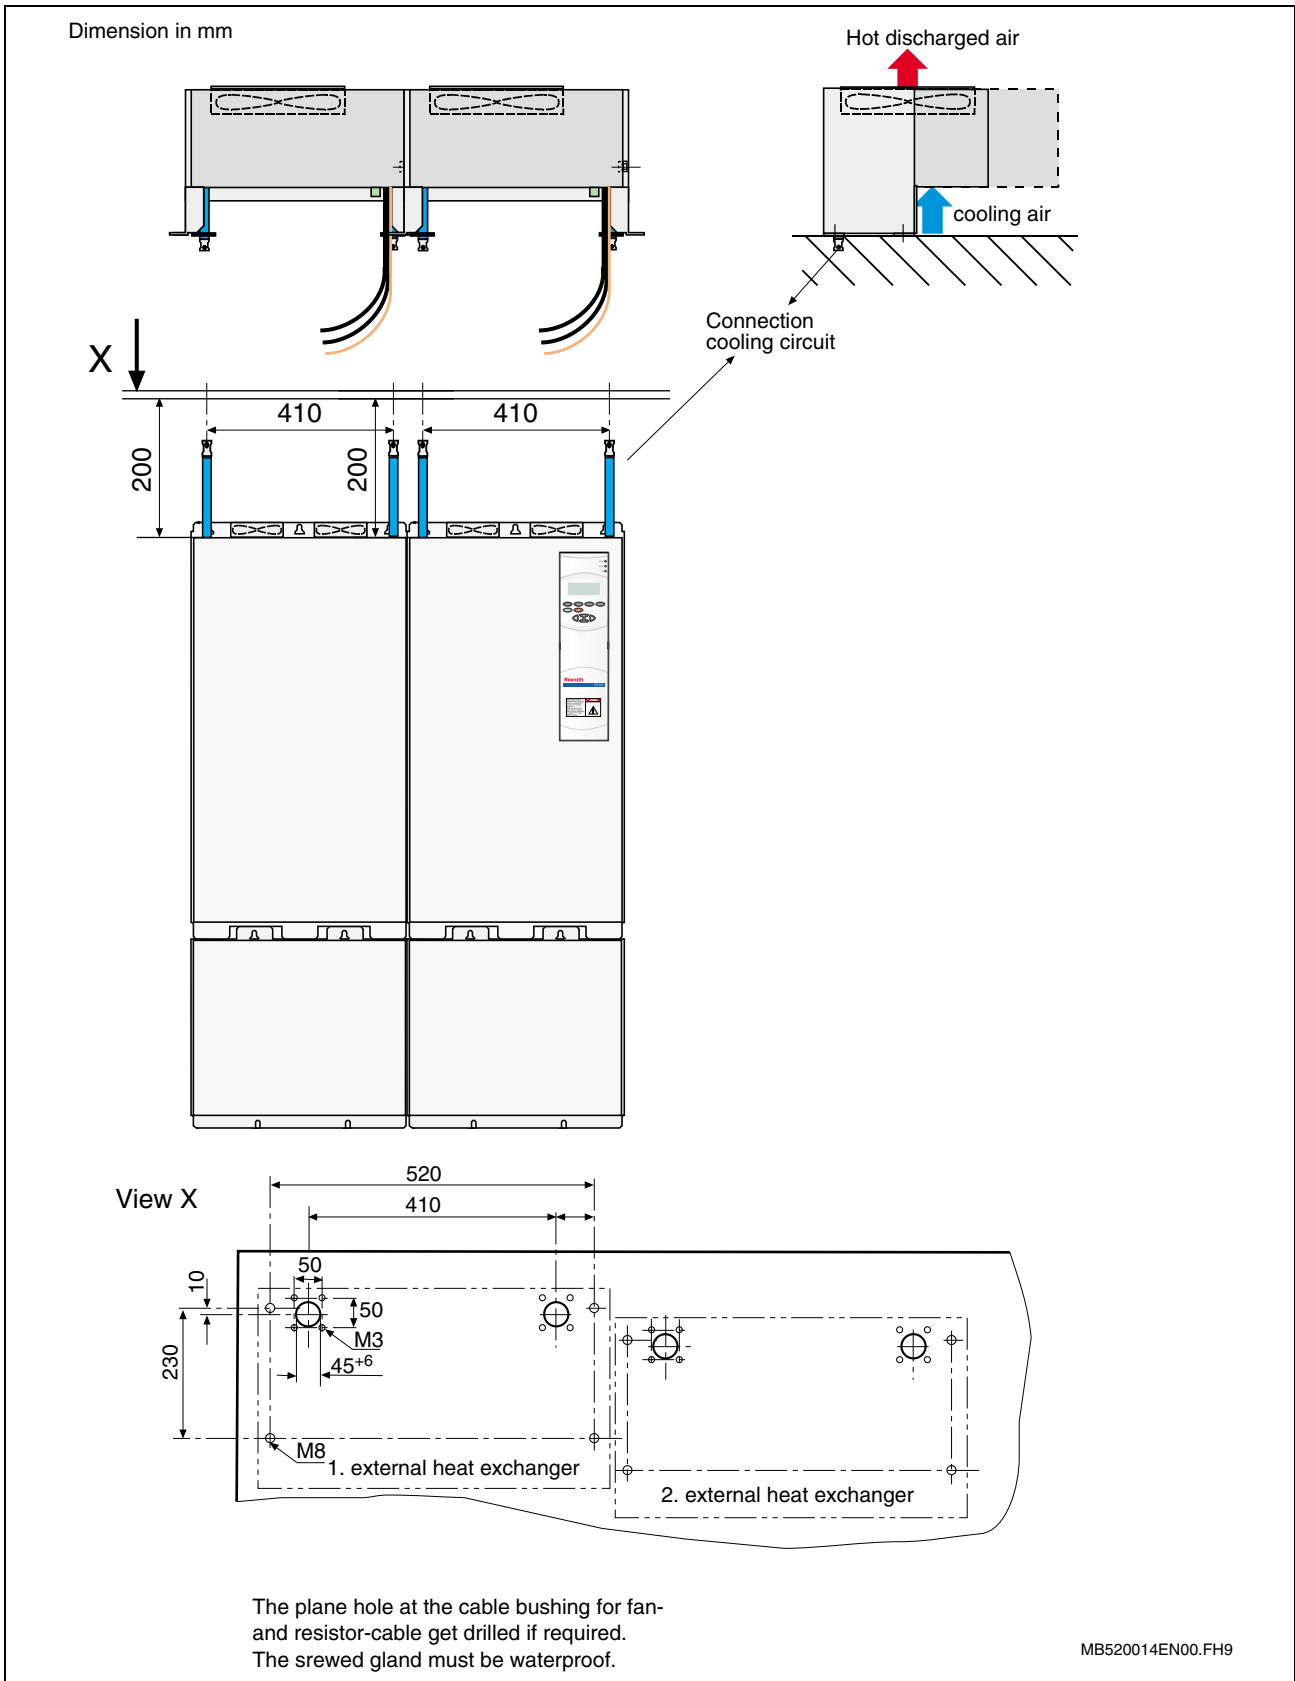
Dimension sheet for cabinet roof mounting, size class G
